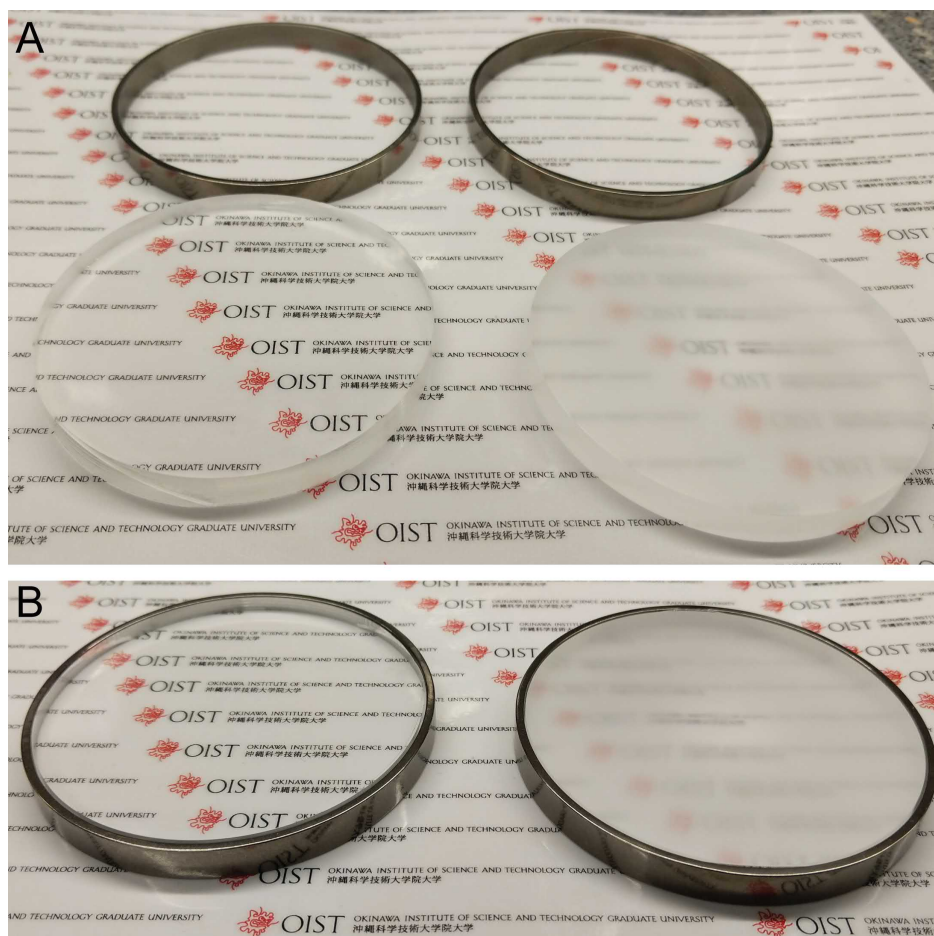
Two-piece assembly of metal-PMMA 3D CAD insert (A) A plain titanium ring and its corresponding PMMA workpiece with paraboloid structure on the left; A titanium ring with paraboloid structures fabricated directly from selective laser sintering of titanium powder and a lathe-fabricated PMMA cylinder; (B) The tight assembly of the metal-PMMA 3D CAD inserts from A.
